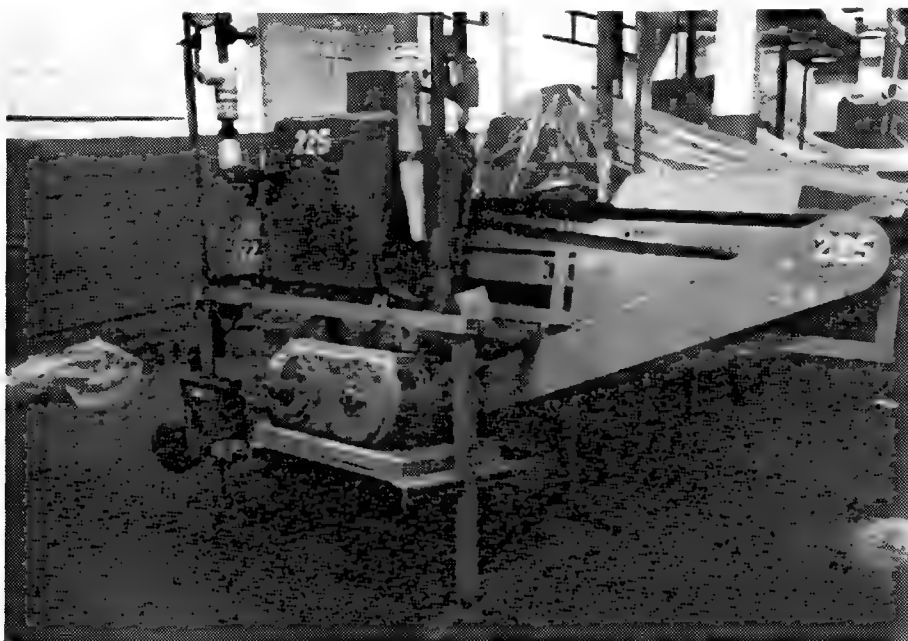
Building 3A: Mouth and Neck Anneal Machine.
